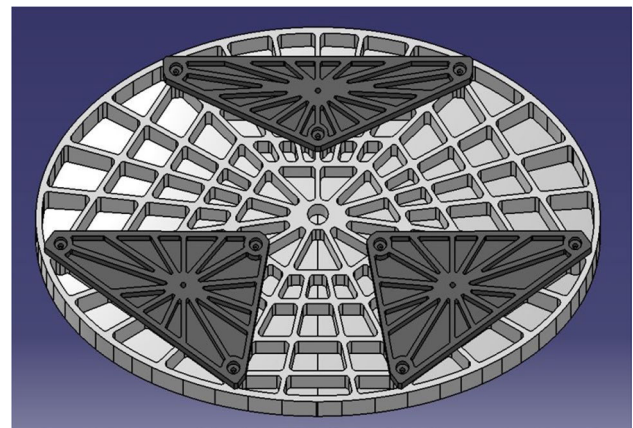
Primary mirror rear side with the foreseen mounting scheme
